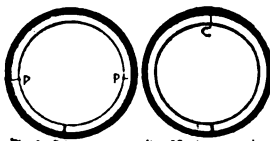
Cylinder out of round. 2C—A spring file has been used to dress the ring, and the ring is now ready to be fitted to the piston.
